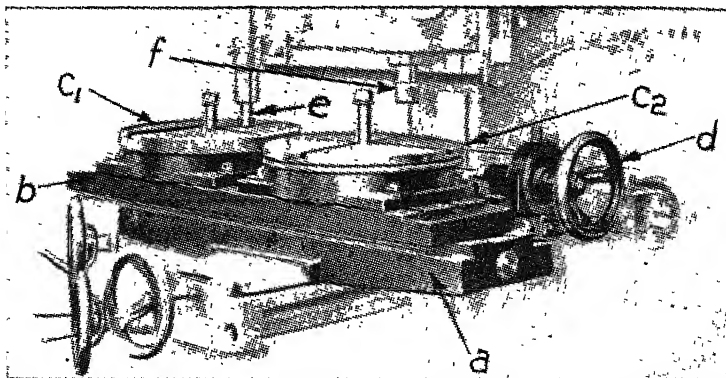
Milling fixture with separate tables for template and cam to be machined; *a*, base of fixture, mounted on machine table; *b*, slide moving on base; *c*₁, circular table carrying the template; *c*₂, circular table carrying the workpiece; *d*, hand-wheel operating worm drives for the simultaneous rotation of the tables; *e*, trace roller, fixed on machine column; *f*, milling cutter (end mill).
